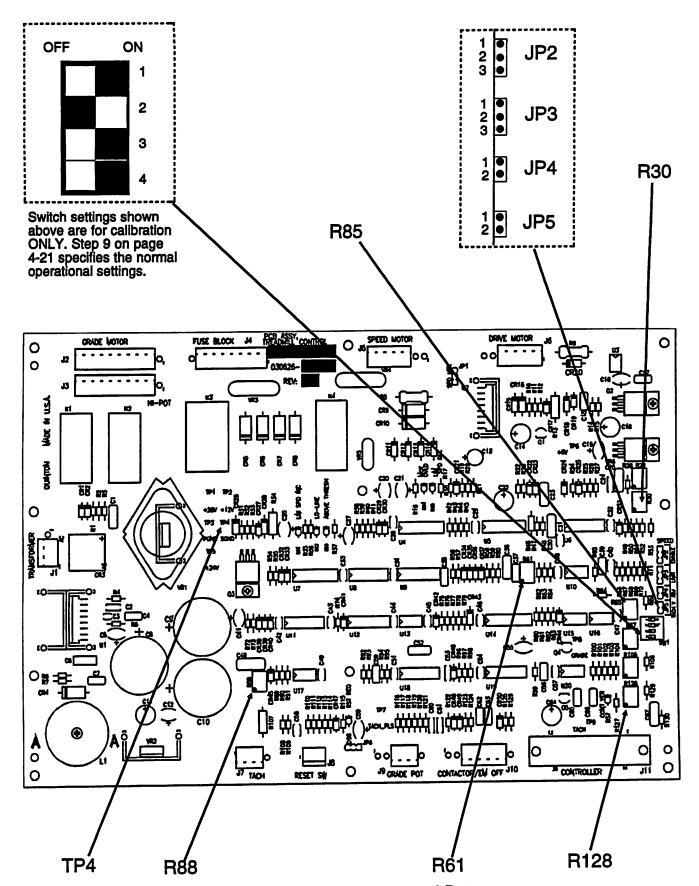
PCBA, showing Switches, Jumpers, and Pots
